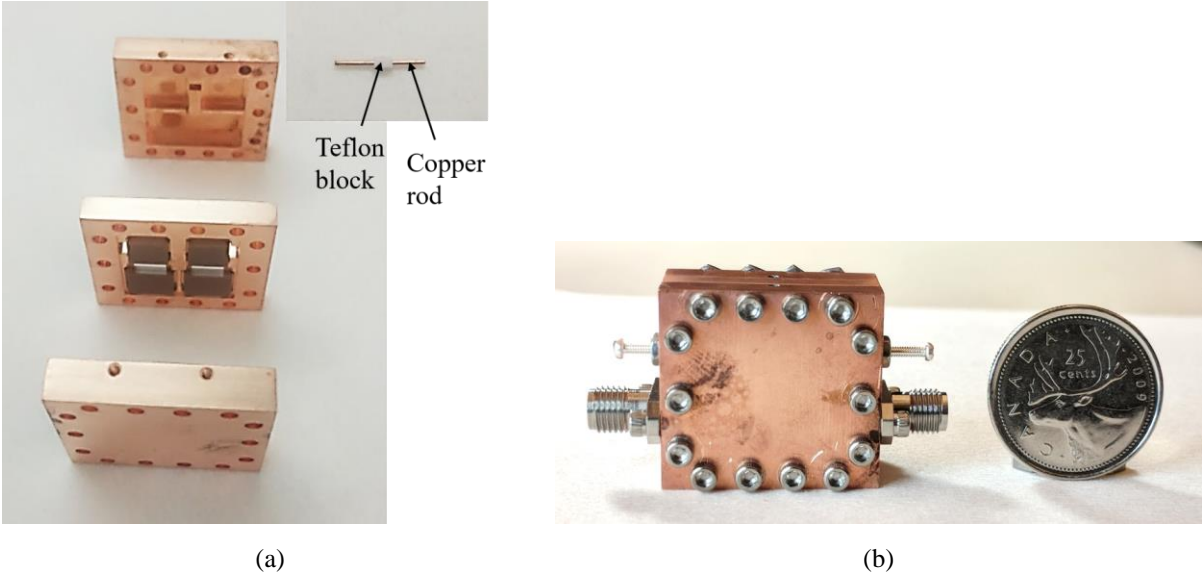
Picture of the fabricated four-pole filter, (a) disassembled filter; (b) assembled filter.
